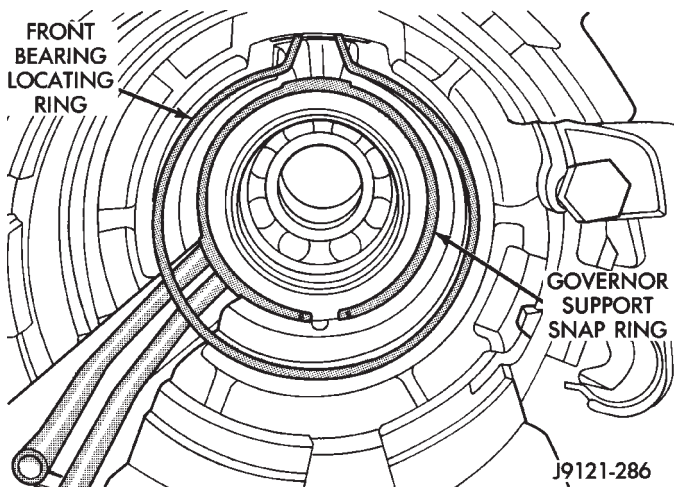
Front Bearing Locating Ring And Governor Support Snap Ring Location
